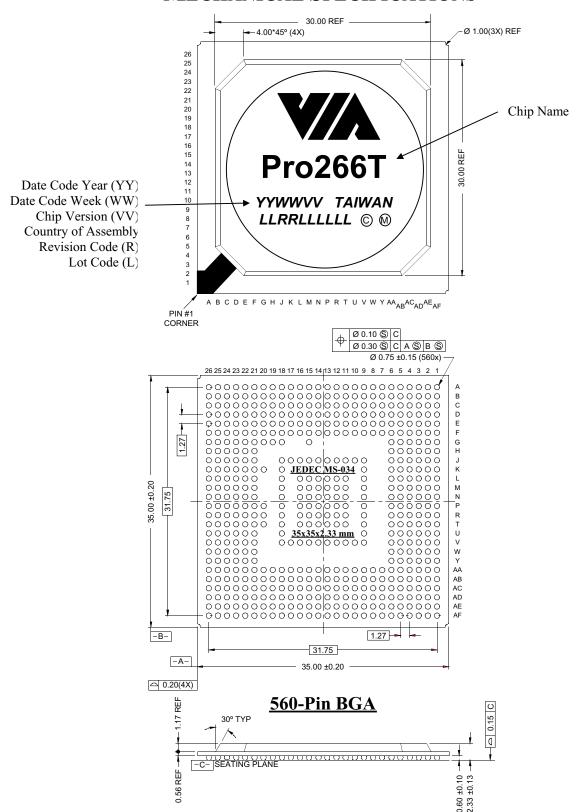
Mechanical Specifications - 560-Pin HSBGA Ball Grid Array Package with Heat Spreader
